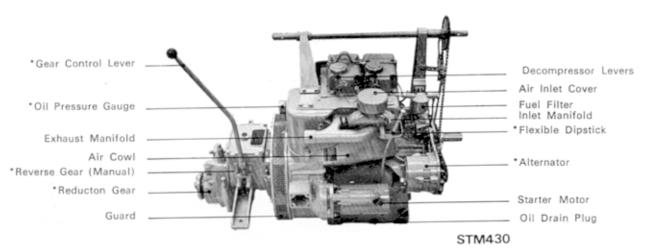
Features of an ST2M with LM100 Reverse Gear-Manifold Side
